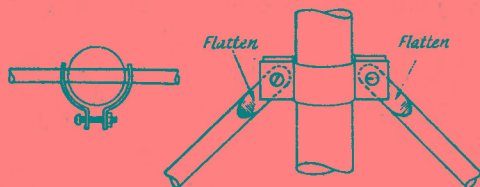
Elements may be run through a wood or metal boom, and held in place with simple aluminum clamps, left. At the right is a clamp for holding boom braces on the vertical support in the 50-MHz 6-element array.
